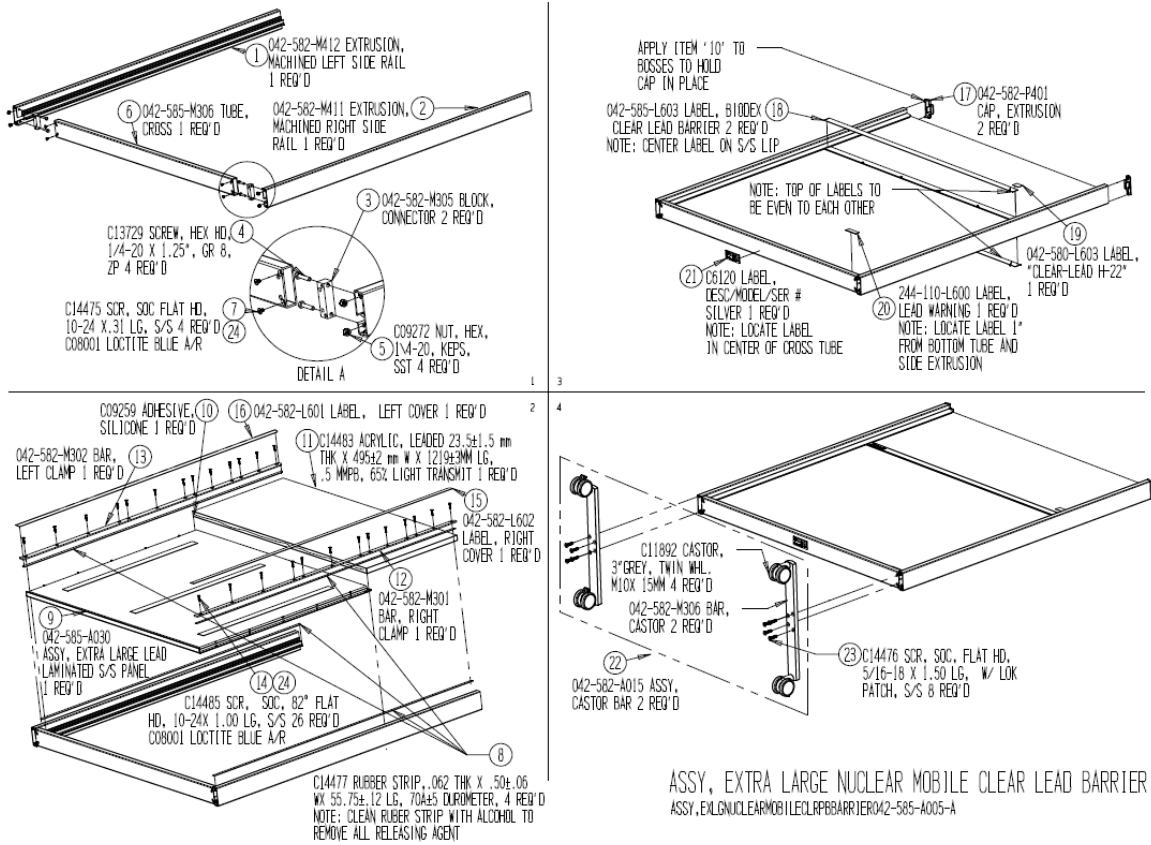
Extra Large Clear-Lead Mobile Barrier Assembly Drawing
